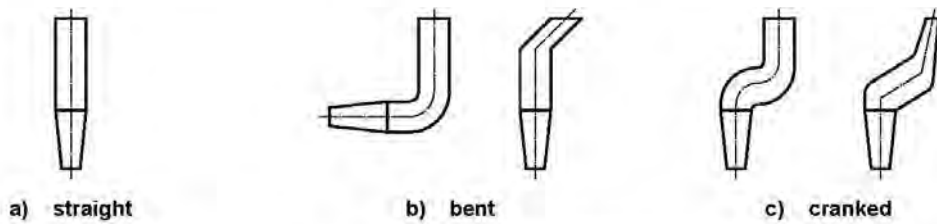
Spot welding electrodes with male taper at mounting end and flat tip
